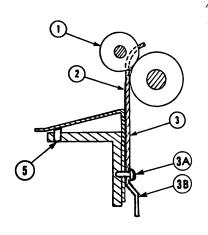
FEEDER PLATE SPRING - LEFT SIDE VIEW
